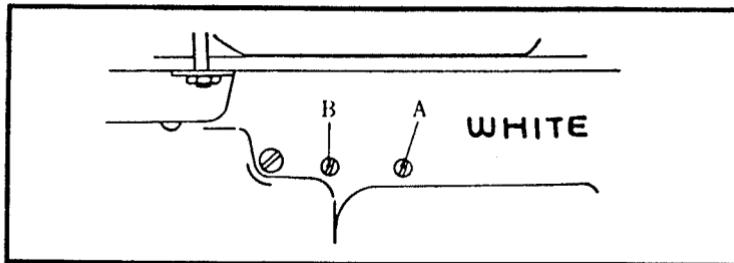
Incorrect meshing of the cam shaft gear to the main shaft gear can cause noisy running on Models 764 and 769.
